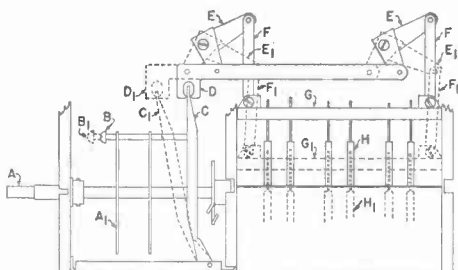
The operating mechanism of the tuner shown in Fig. 33.
